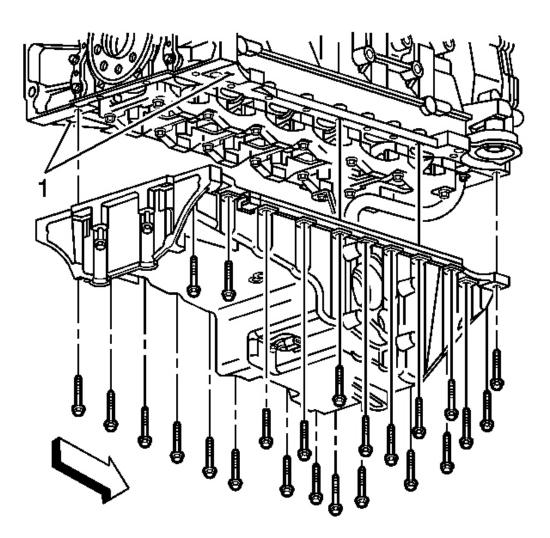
View Of Engine & Oil Pan Bolts Courtesy of GENERAL MOTORS CORP.
